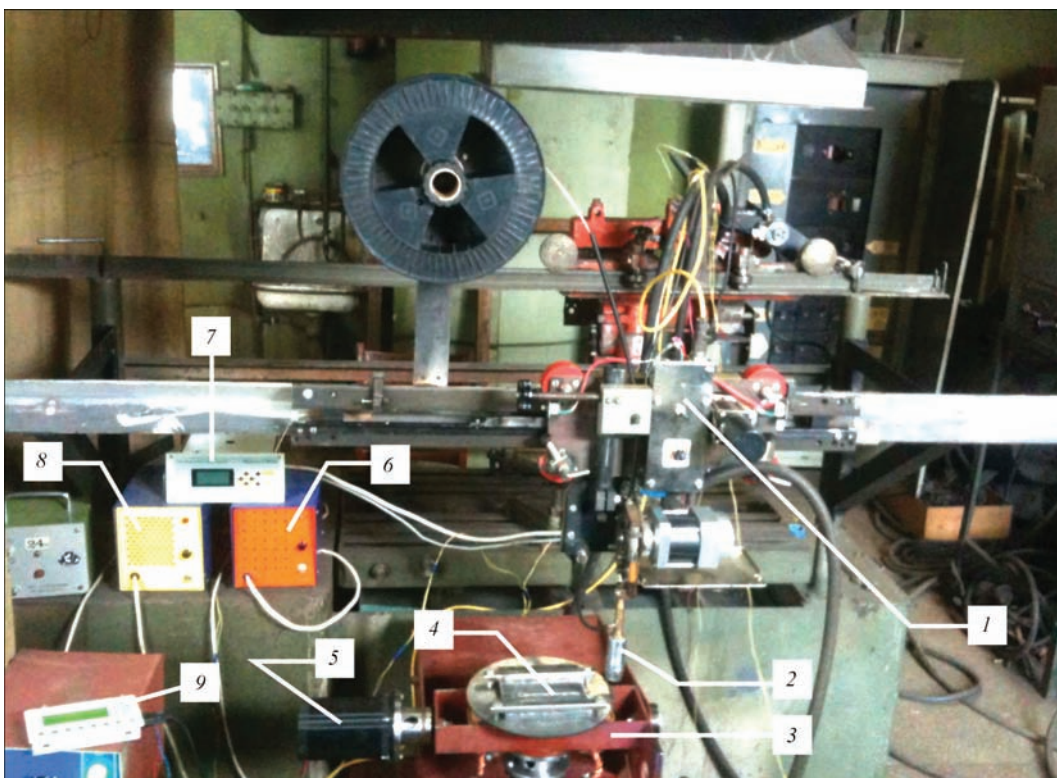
Scheme of installation for surfacing with a movable bed: 1 — control panel for torch moving; 2 — torch; 3 — bed; 4 — part being deposited; 5 — motor, imparting oscillations to the workpiece; 6 — power supply unit of control panel, pos. 1; 7 — indicator of torch speed movement; 8 — power supply unit of motor, pos. 5; 9 — programmable panel for control of motor operation mode, pos. 5
